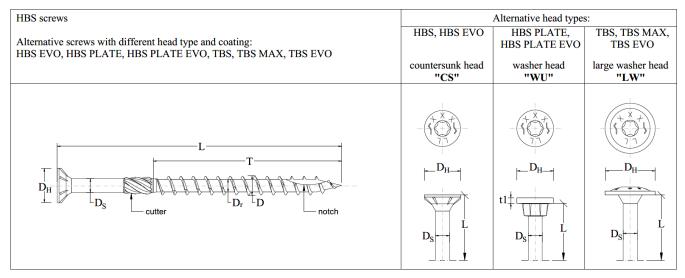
TYPICAL PARTIALLY-THREADED CARBON STEEL SCREWS Note: The presence or absence of the reamer knurl (cutter) and notch depends on screw size and length.
